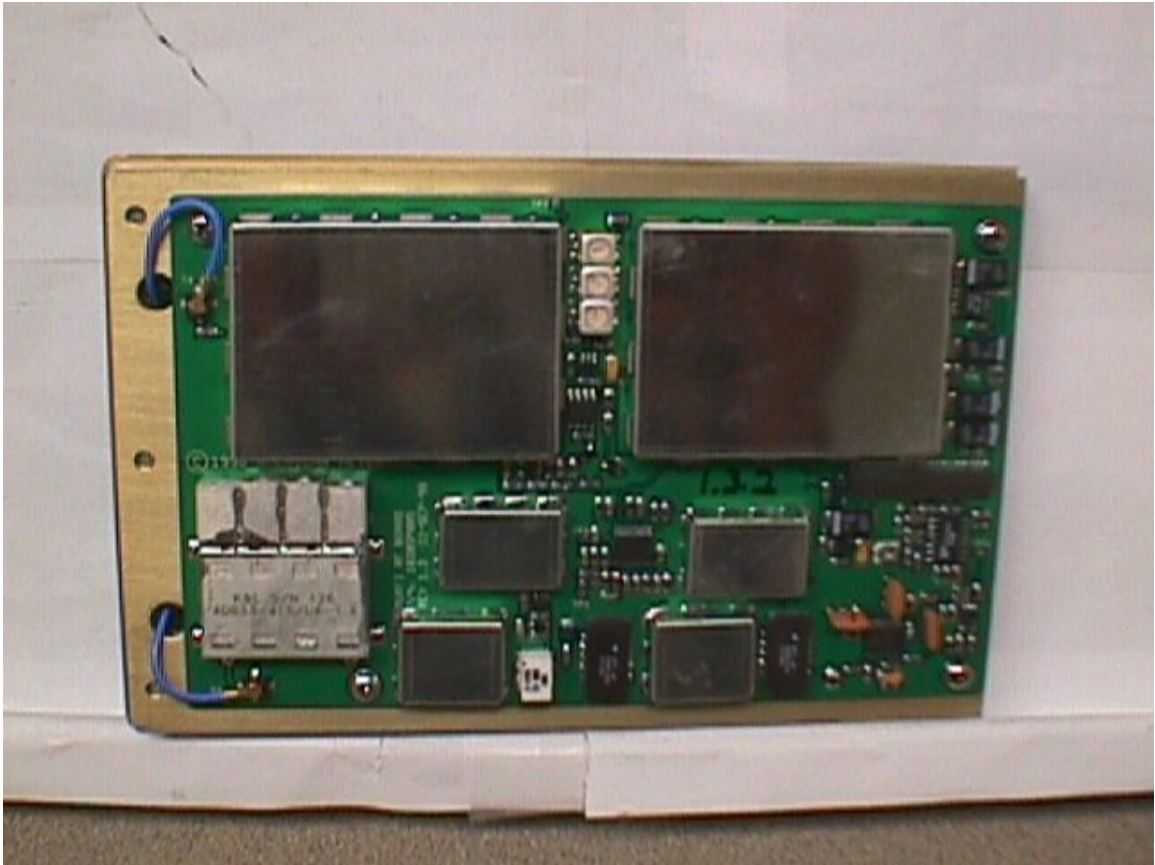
URF DIGITAL PCB COMPONENT SIDE
